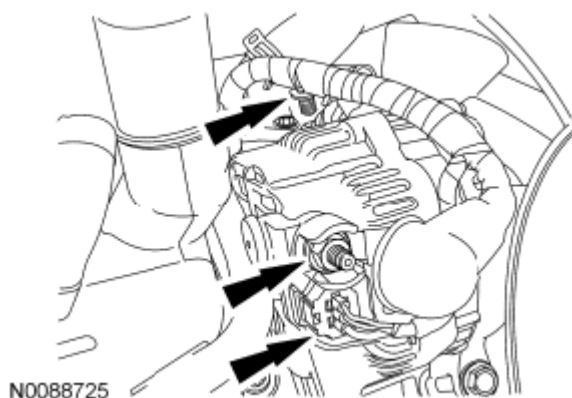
Locating Generator B+ Cable And Electrical Connector With Nut
